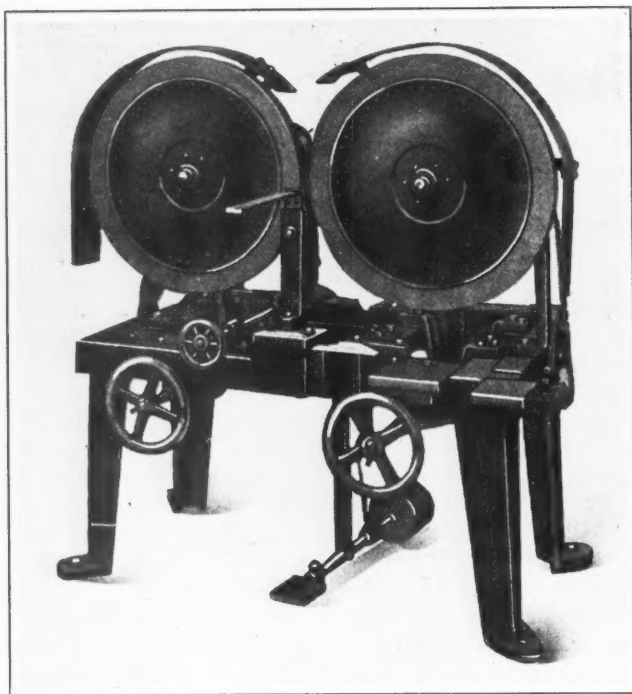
Semi-automatic Double-head Polishing Machine for Knife Blades
